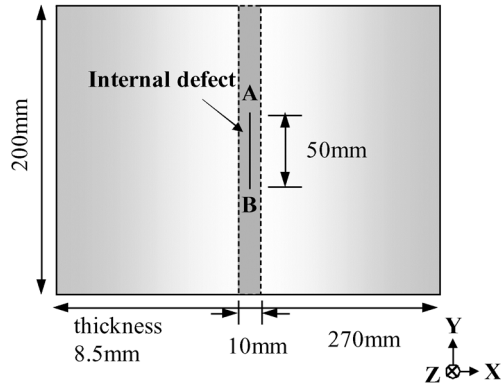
Iron plate with a slit like artificial defect of 50 mm in length inside the welding parts
